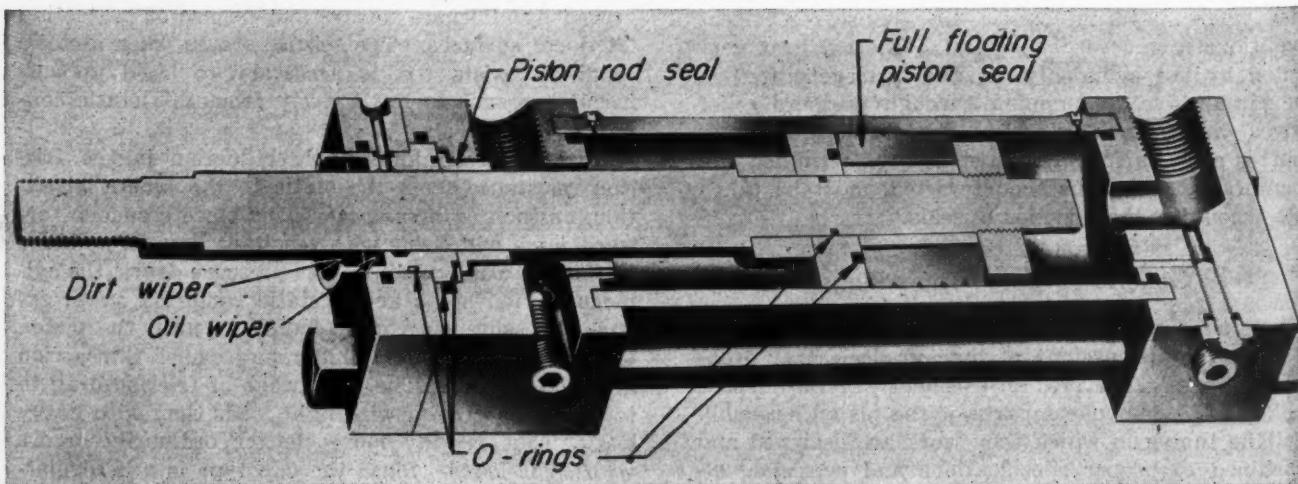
Below—Cutaway view of a precision-seal cylinder utilizing a non-expanding metallic seal on the rod. This seal is full floating and utilizes static O-rings on load-carrying piston
